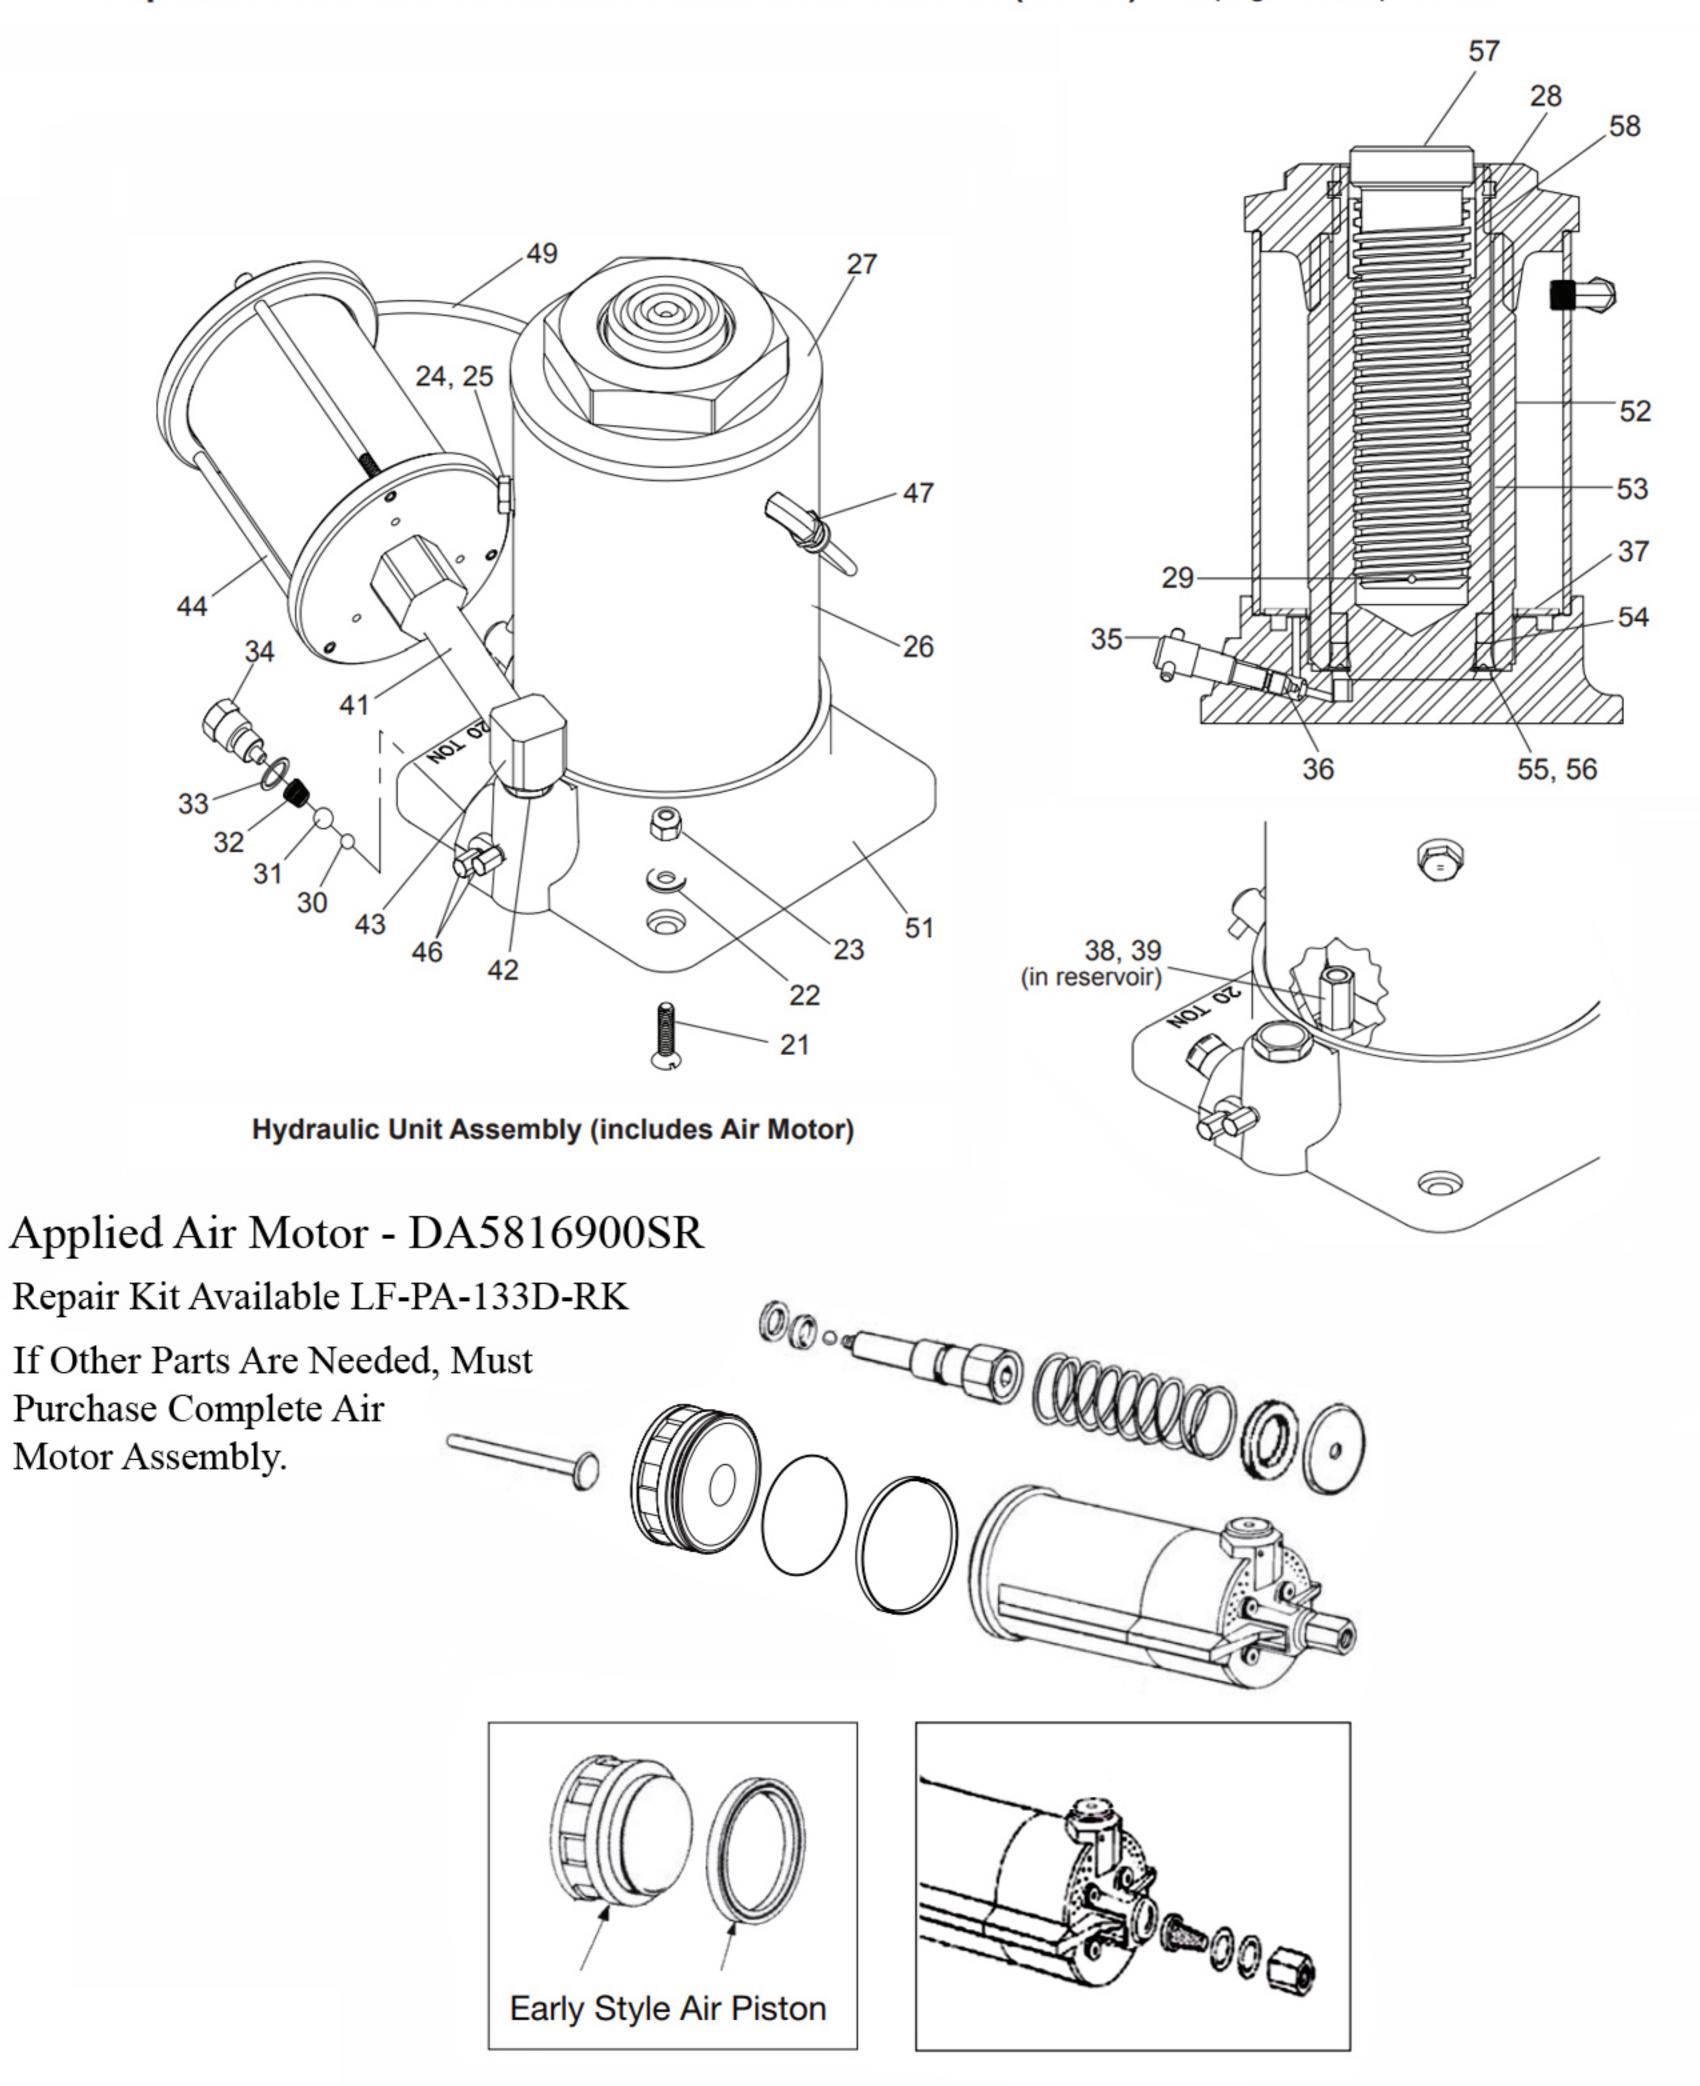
Parts Illustration for Model HW93733 - Air Motor & Hydraulic Unit
